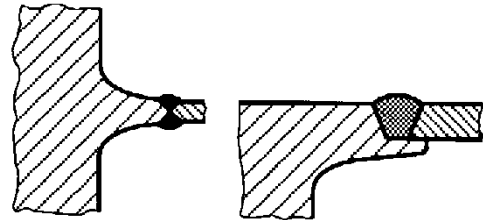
Welding flanges on steel castings of forgings
